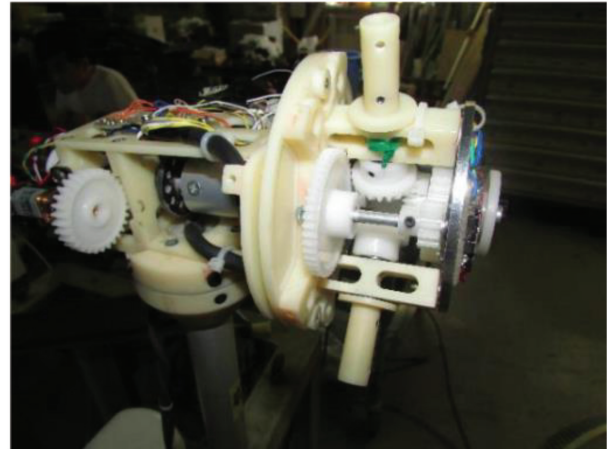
Blade pitch actuator with bevel gear (Mizukami et al., 2016)
